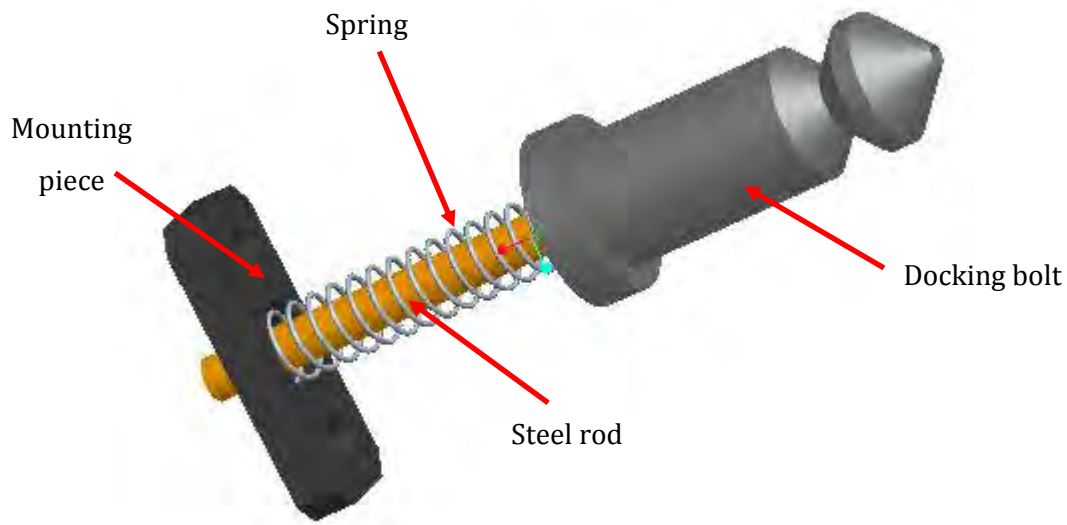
A CAD model of a spring bolt assembly with its docking bolt, steel spring, smooth rod and supporting mounting piece.
